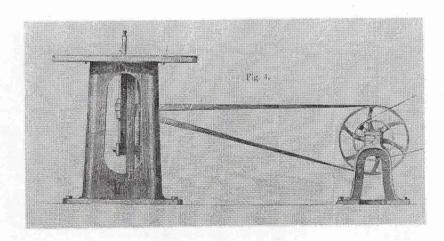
A single spindle machine. From Rankine, The Cyclopaedia of Machine and Hand-Tools, 1869.
